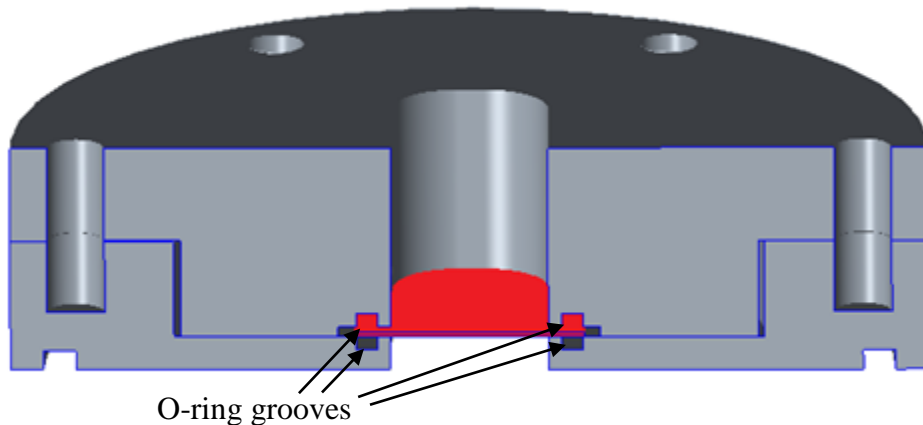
Test heater and holder. The test heater is shown in red and was sealed using butyl O-rings.
